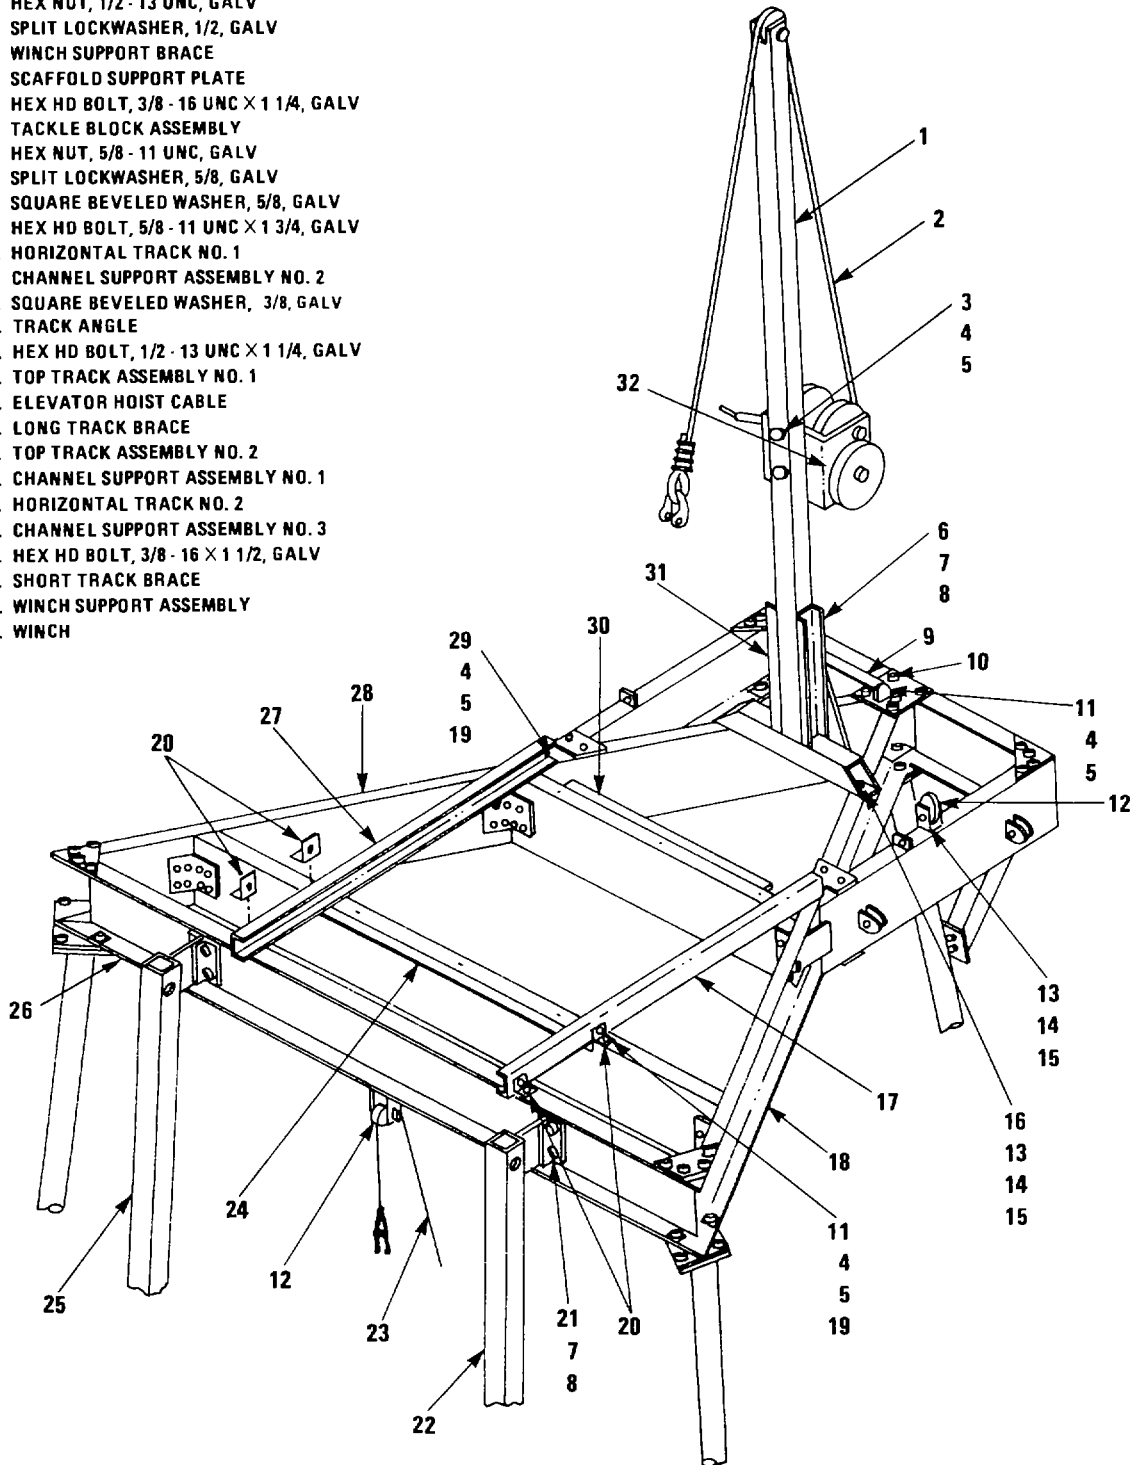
Tower Adapter with Horizontal Tracks and Scaffold Winch Assembly
